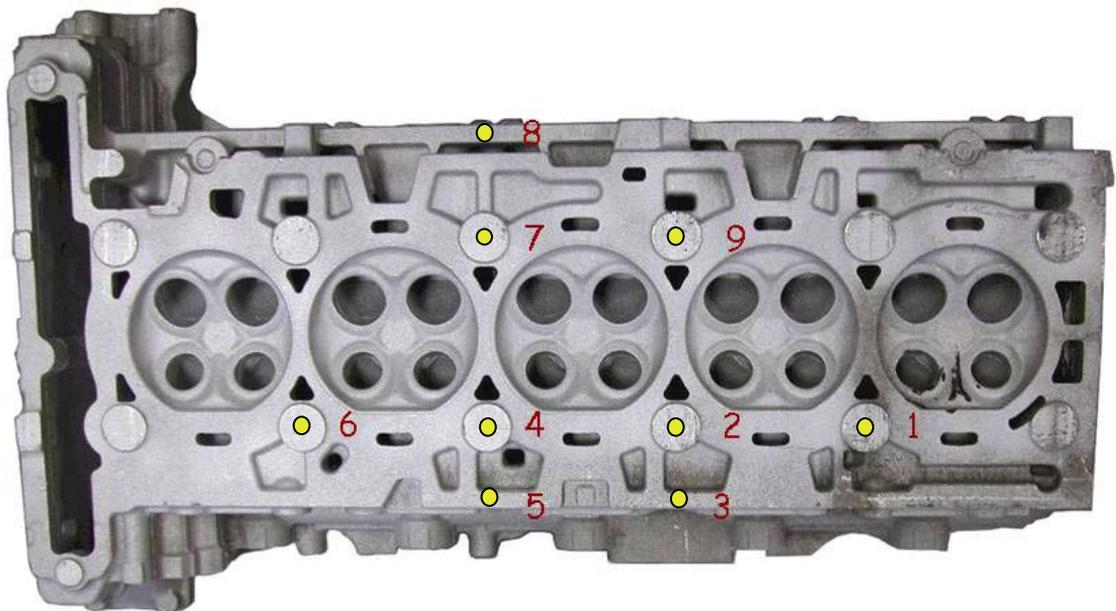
Cast aluminum A356 engine head instrumented with K-type thermocouples [19]
